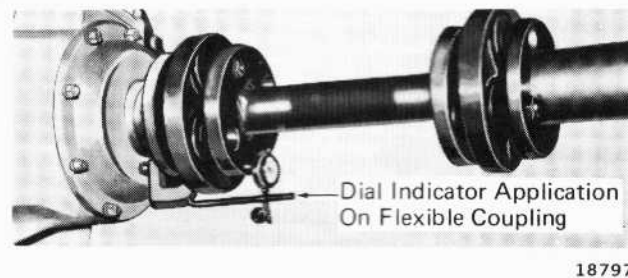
Auxiliary Generator Drive Coupling Alignment
